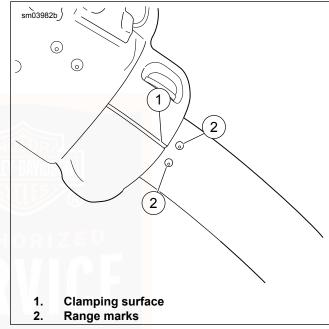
Left Hand Control Assembly to Handlebar Alignment
